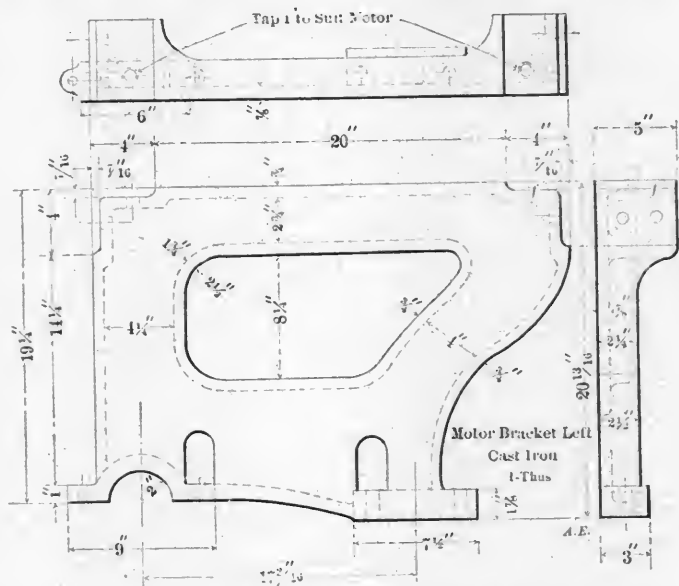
DETAILS OF THE SPECIAL BRACKET DESIGNED FOR SUPPORTING THE MOTOR ON THE 42-IN. NILES LATHE.
